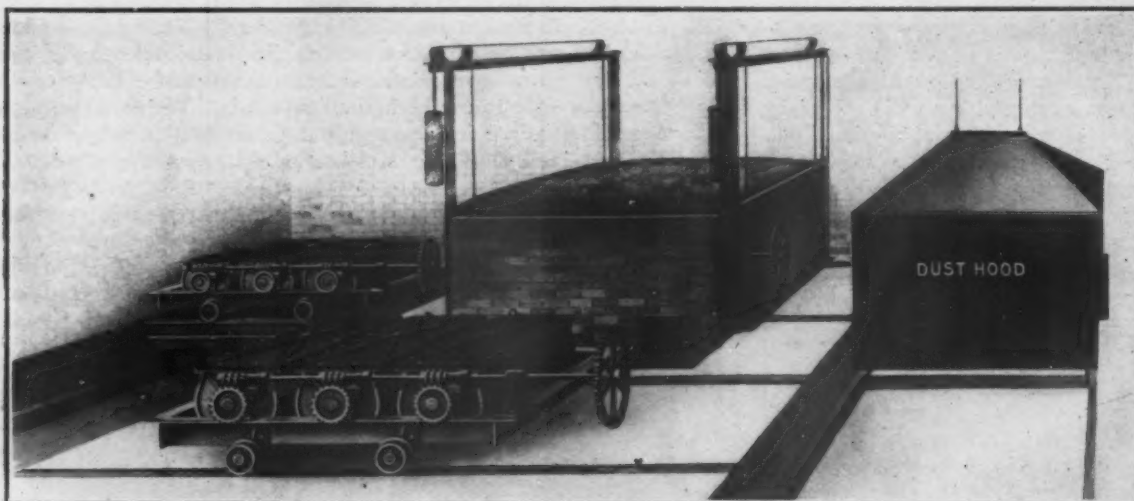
Complete Sherardizing Equipment. Built by the Globe Machine & Stamping Company, Cleveland, Ohio.
